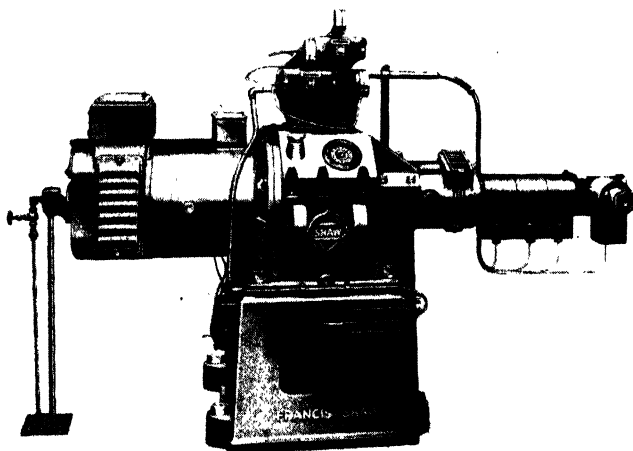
Typical extruder with right-angled head for covering wire<sup>8</sup>
